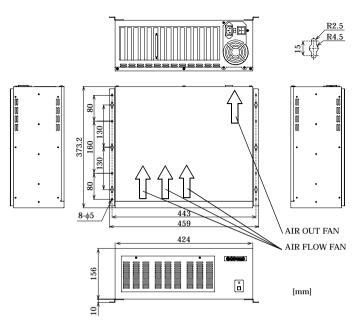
Outside Dimensions < ECH(PCI)BE-F13A, Horizontally placed >
